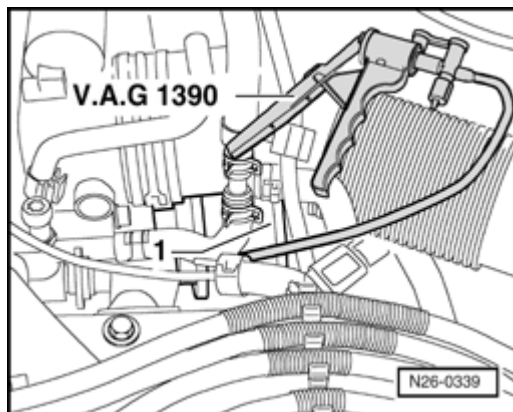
Hand Vacuum Pump Connected To Vacuum Hose From Combi-Valve
